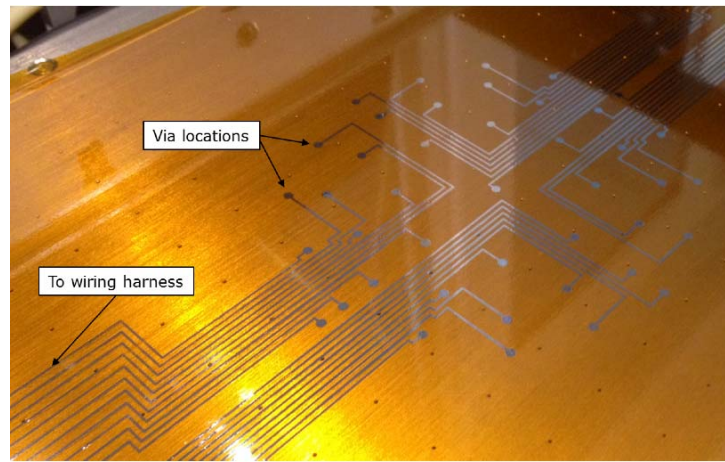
25 μm thick Kapton routing layer with printed electrode traces.
